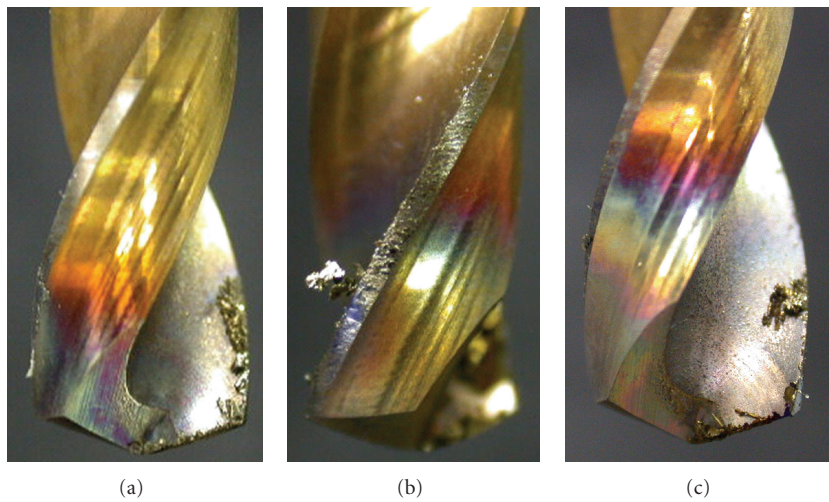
Evolution of the drilling tool after (a) eight, (b) ten, and (c) fourteen drills at 30 m/min.
